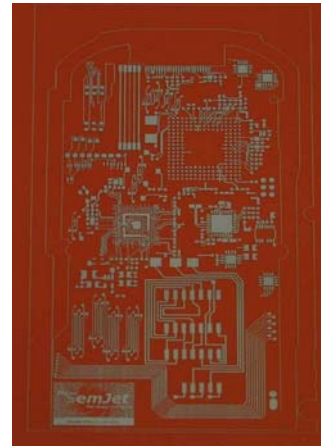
Actual printed circuit board for mobile phone by inkjet printing
